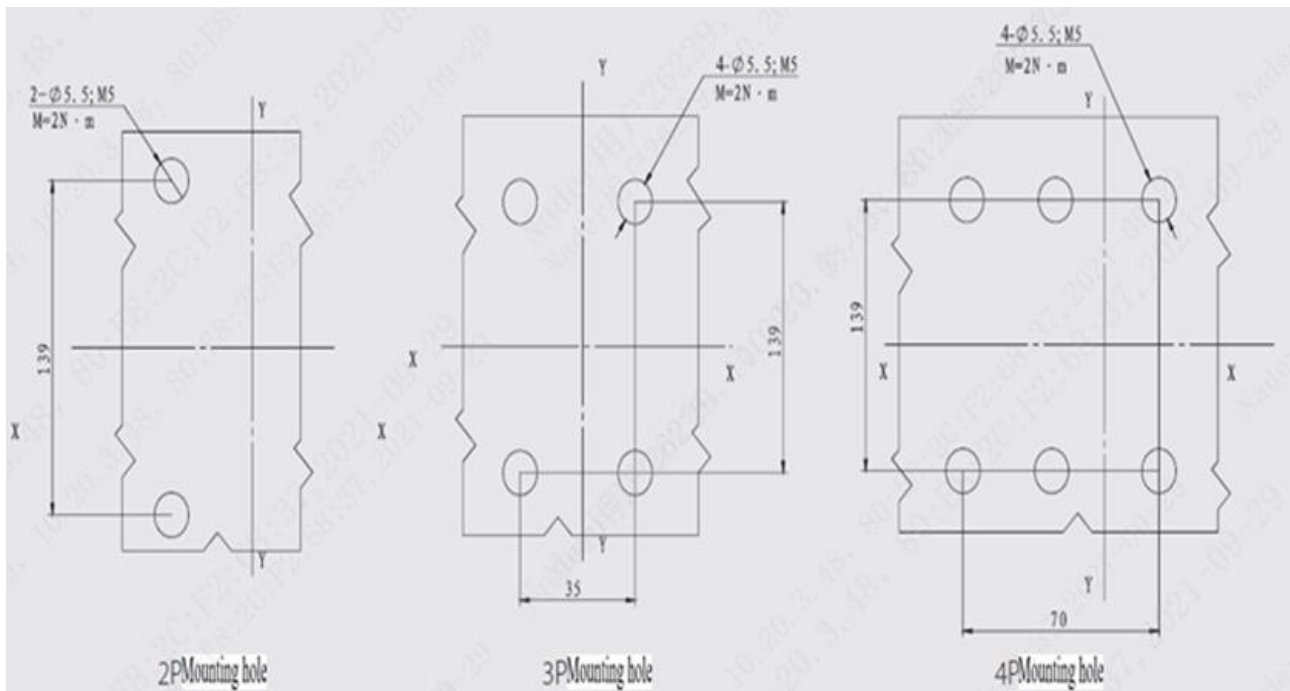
NDM5-250L/M/H 2P 3P 4P Installation dimension drawing of front board wiring products
